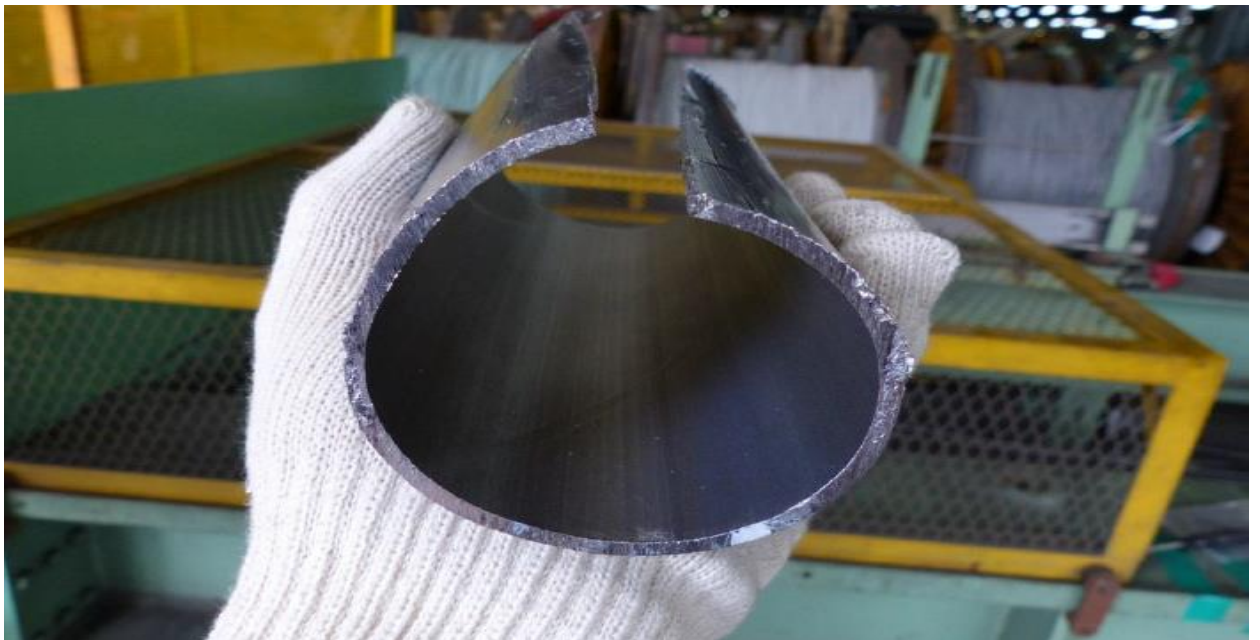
Inspection of inner surface of a lead sheath. No sign of wrinkles.
